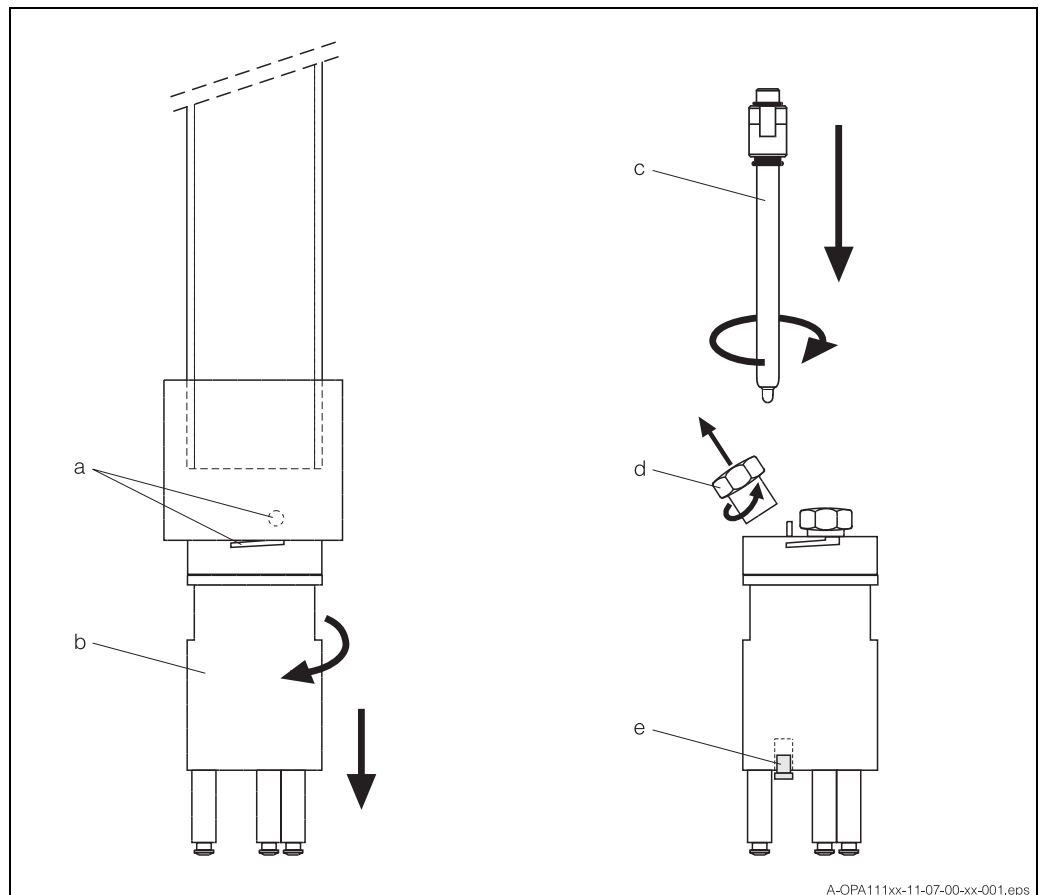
Removal of the electrode holder (left), mounting of the pH/redox electrode (right)
